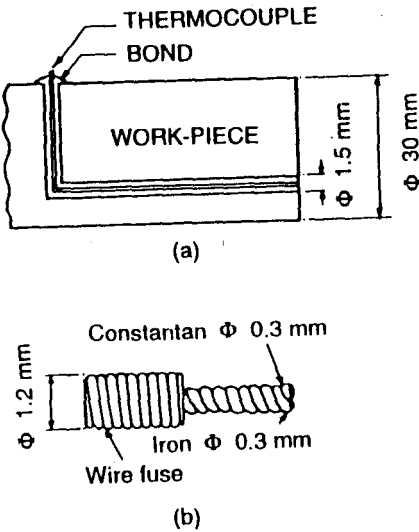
a) Arrangement of the thermocouple wires in the work piece. b) Twisted insulated thermocouple wires wound with fuse wire for stable thermal contact (Ref.81).
